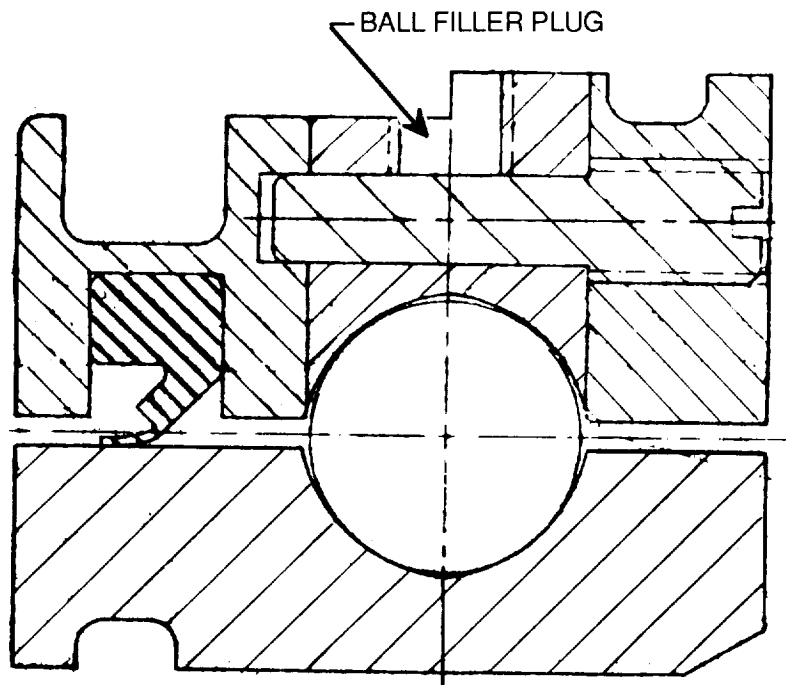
Shoulder Joint Construction Showing Four-Point Bearing and Integral Seal
